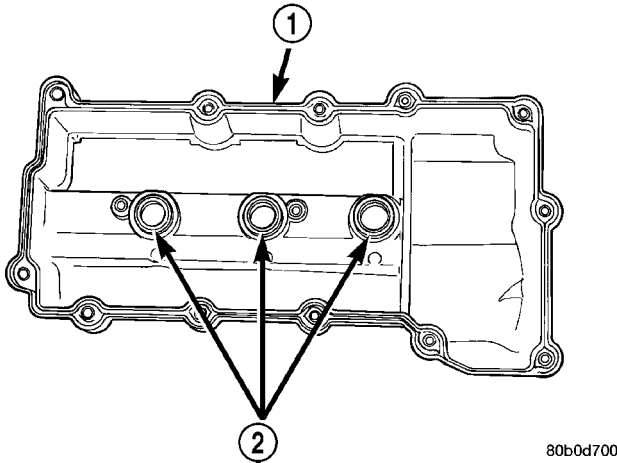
Cylinder Head Cover Gasket and Spark Plug Seals
